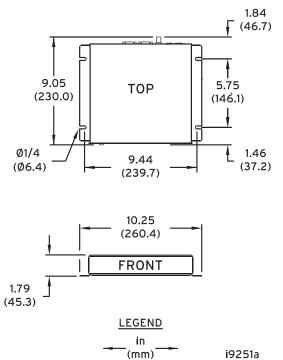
SEL-3530-4 Surface-Mount Dimensions
